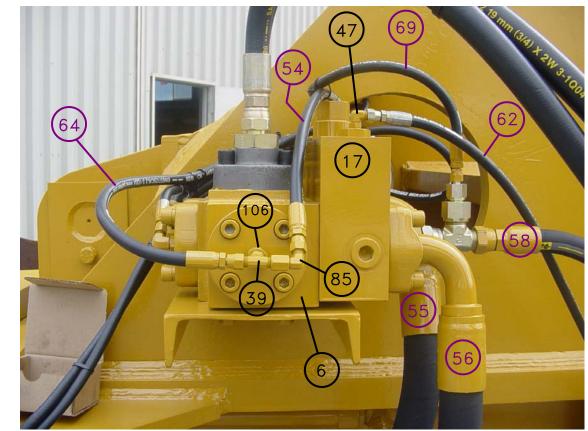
LHS SHOWING WINCH MANIFOLD & FEROY VALVE
